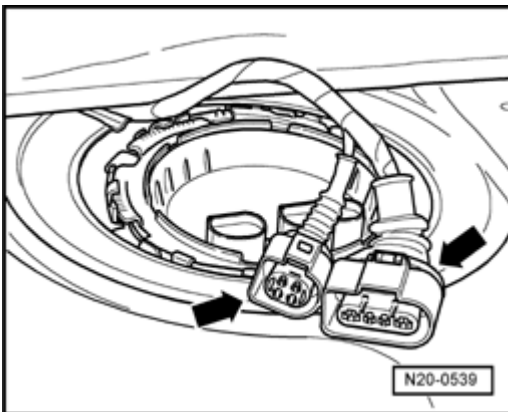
Disconnecting Connectors From Right Sensor Flange
